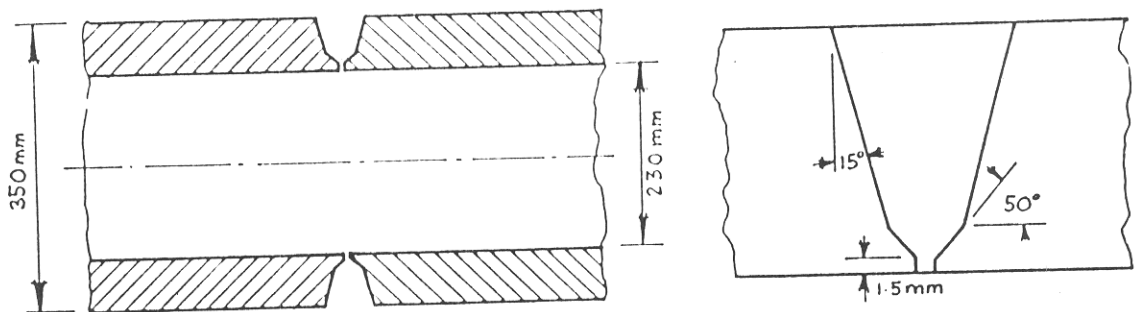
Left, the geometry of steam-pipes, used to carry superheated steam from the boiler to the steam turbine. Right, a typical weld preparation.
